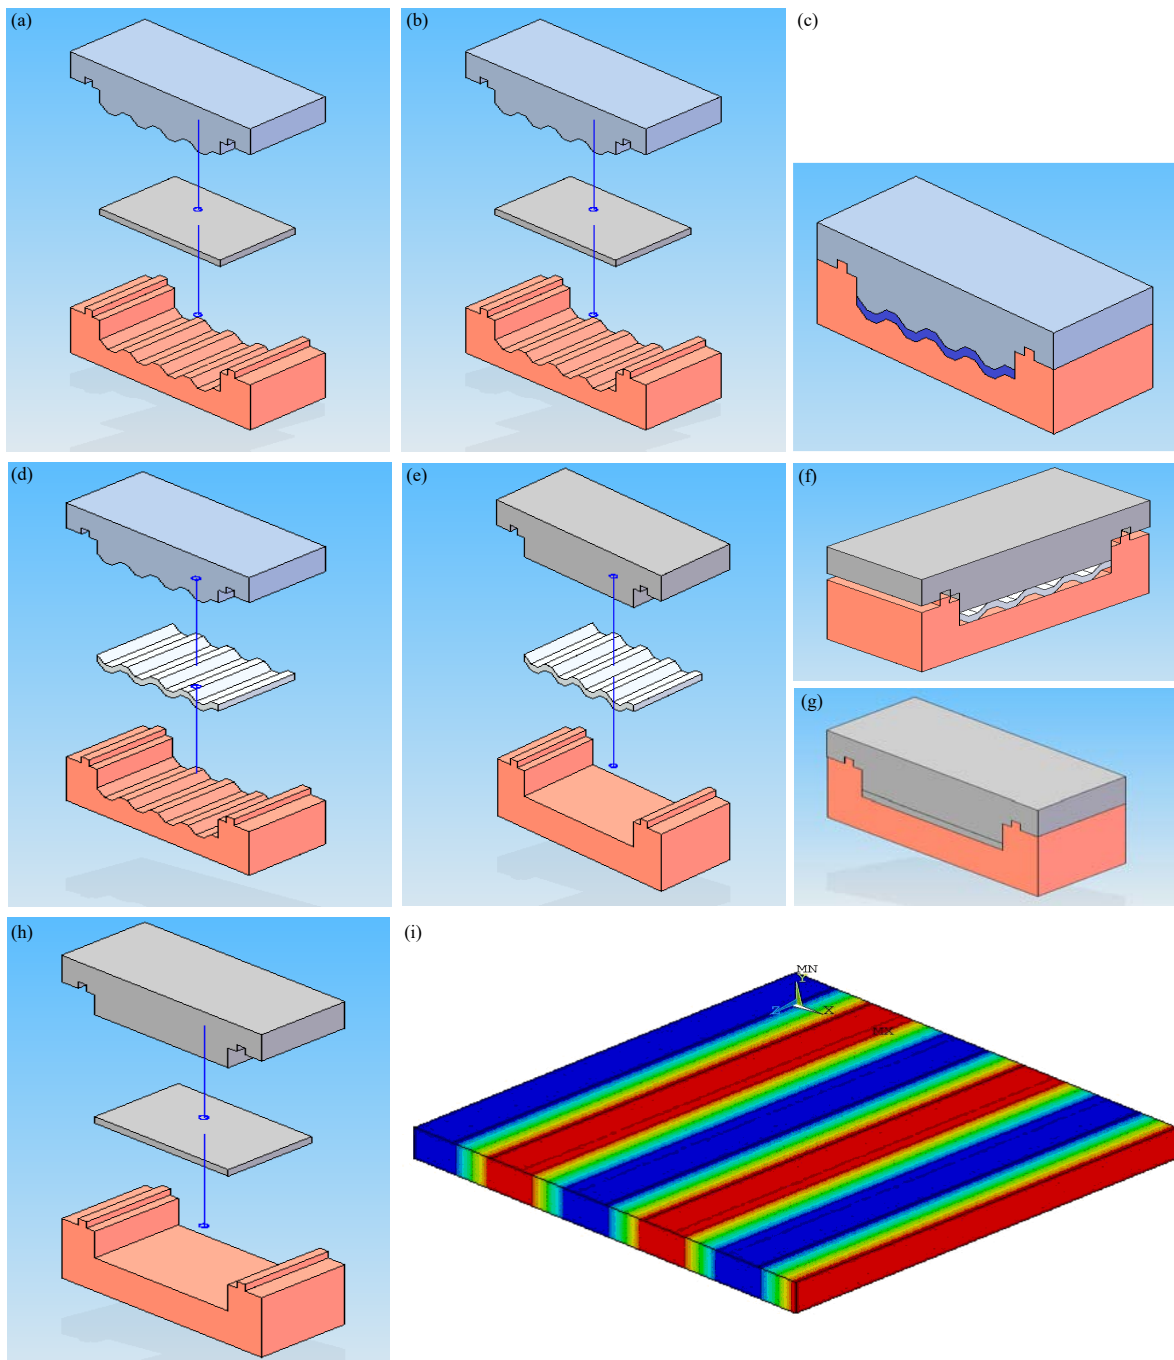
(a-i): Illustration of a constrained groove pressing technique, (a) Before pressing, (b) Assembly of die and specimen, (c) After pressing, (d) After moving the dies, (e) Before pressing corrugated specimen, (f) Assembly of flat die and specimen, (g) After pressing with flat dies, (h) After moving flat dies and (i) After two press the effective strain in pure shear region are 0.58 per pressing, amount of effective strain introduced is 1.16
